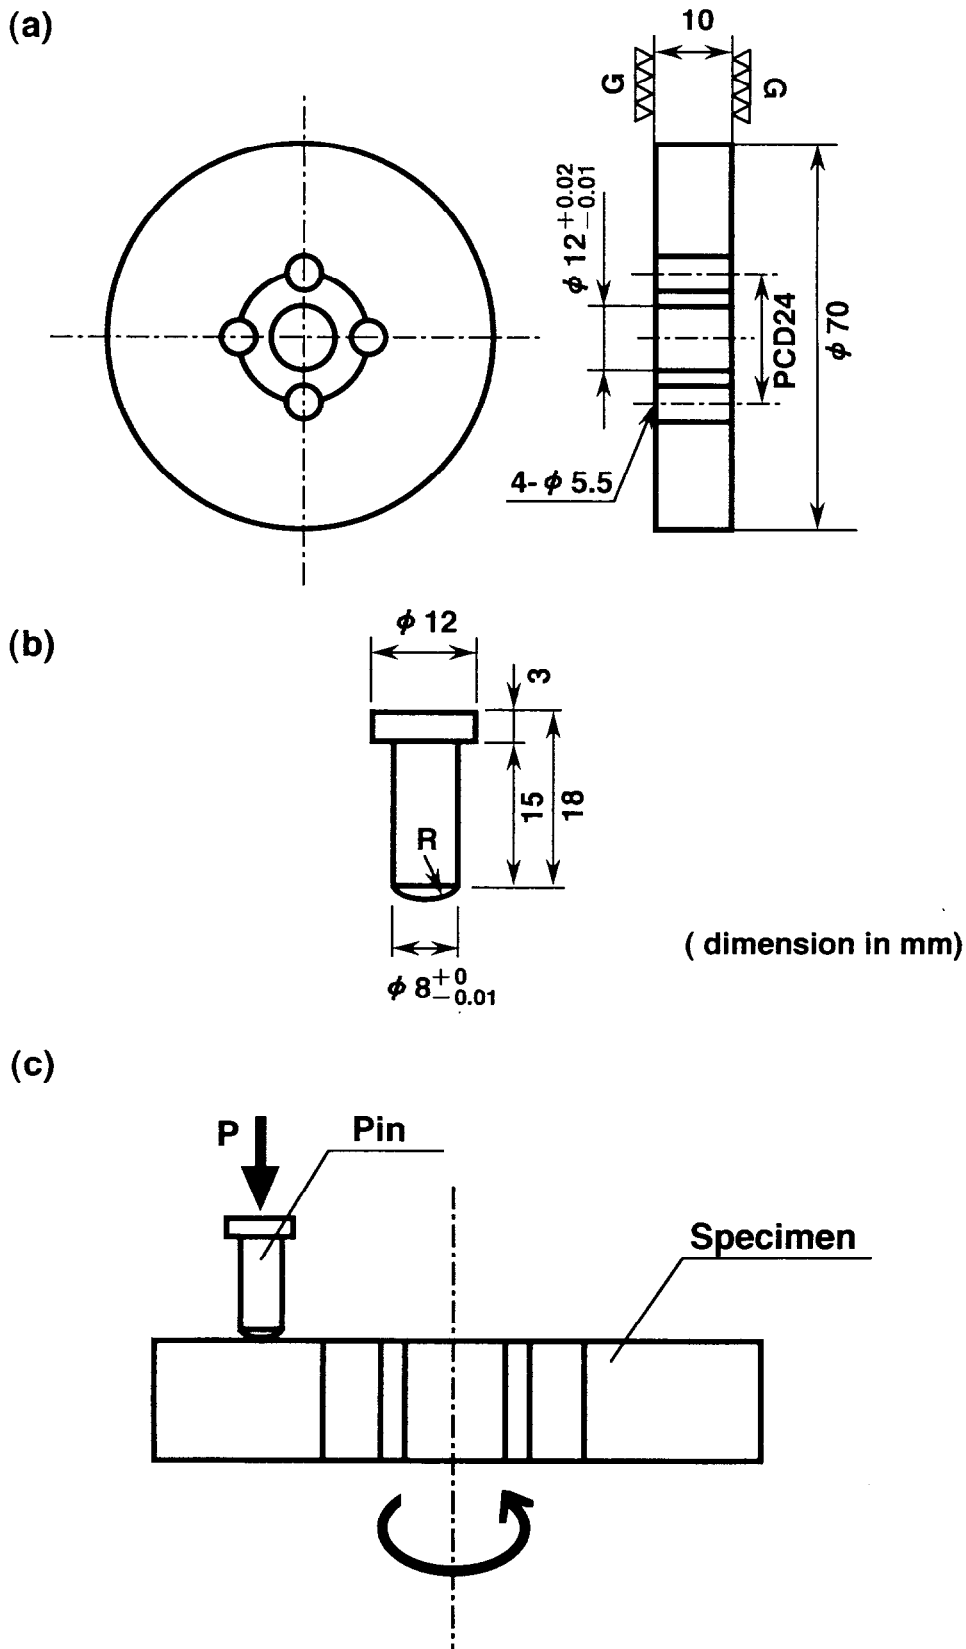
Wear test condition; (a) disc (specimen), (b) pin, (c) specimen and pin arrangements.
